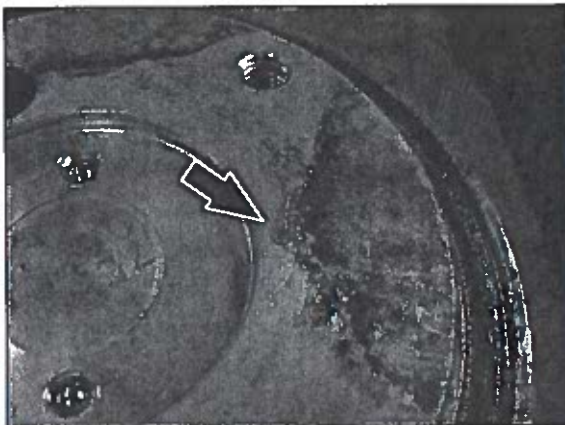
Excessive Rust/Corrosion Buildup on Top of Coupling Body
